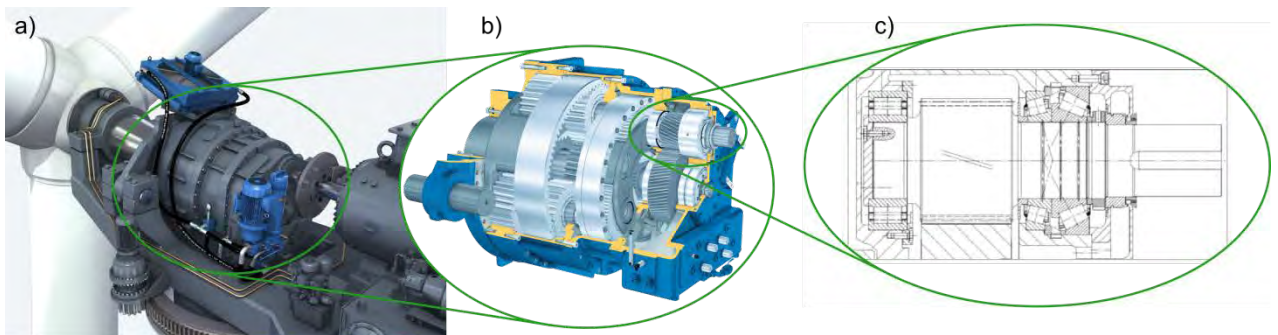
Use of rolling bearings at high speed shafts of wind turbine gearboxes: a) wind drive train, b) gearbox with three planetary stages and a spur gear stage, c) high speed shaft with CRB and paired TRB to retain axial load as a result of helical gearing
